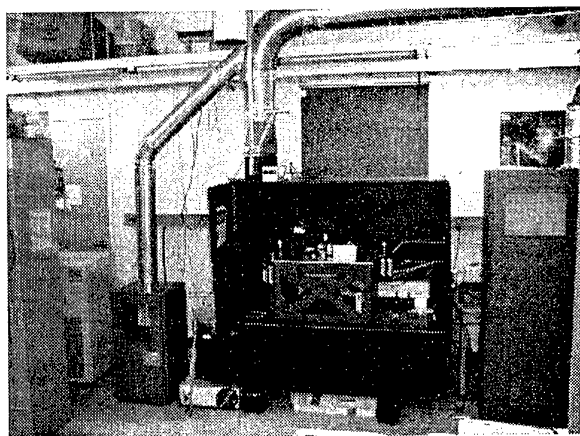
Ensemble view of the Steward Observatory laser micromachining system
